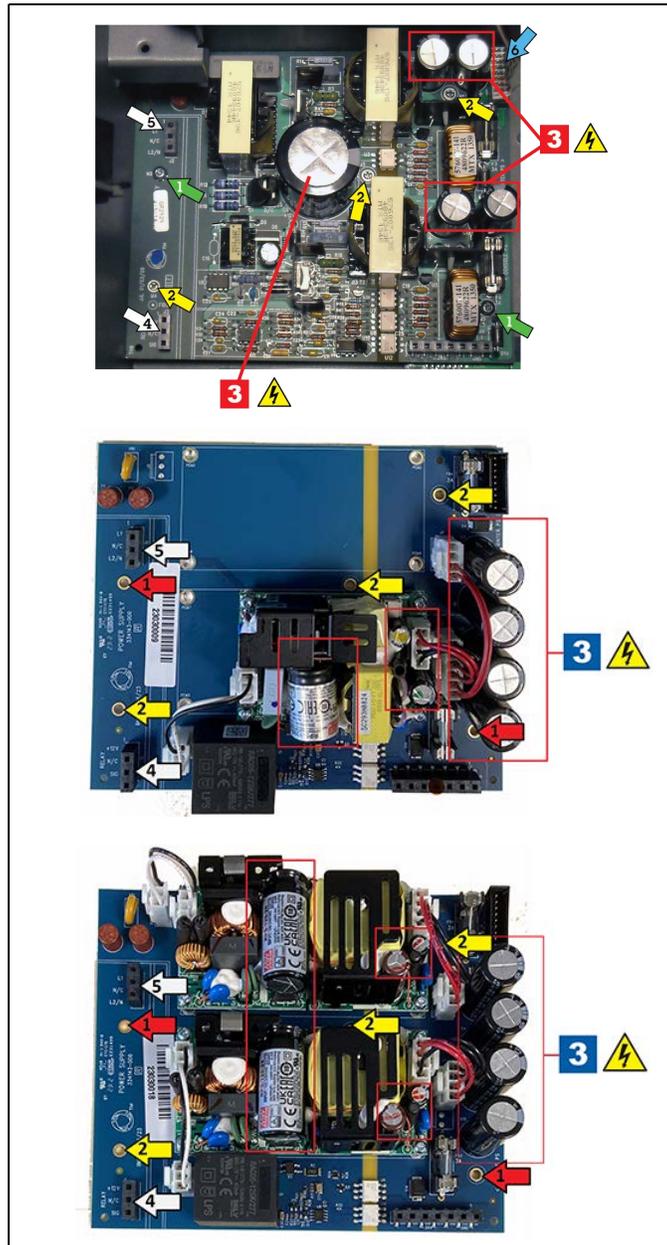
Removing One of the Three Possible Power Supply Board Configurations
